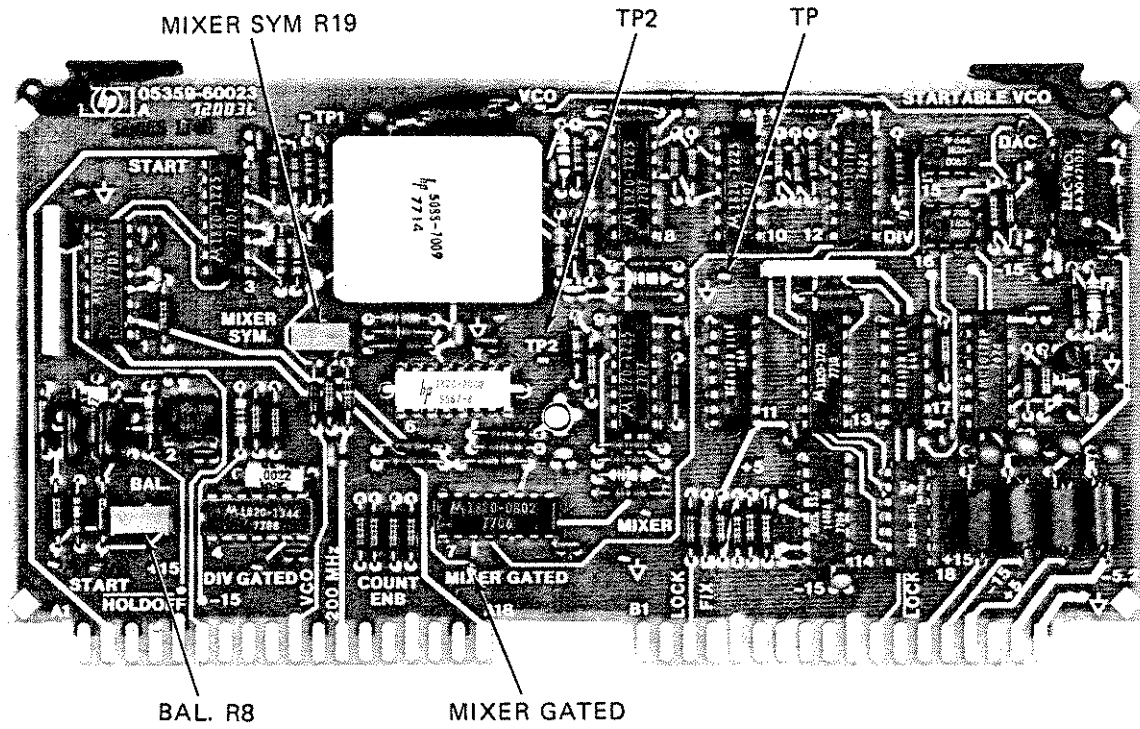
A23 Startable PLL Oscillator Assembly Adjustments (Continued)
